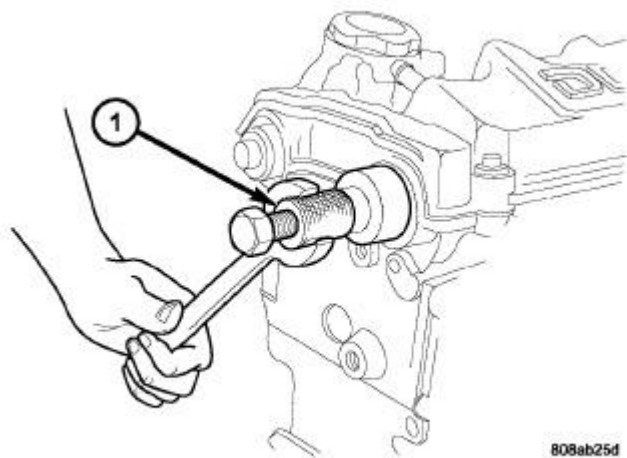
Camshaft Oil Seal - Removal With C-4679A
